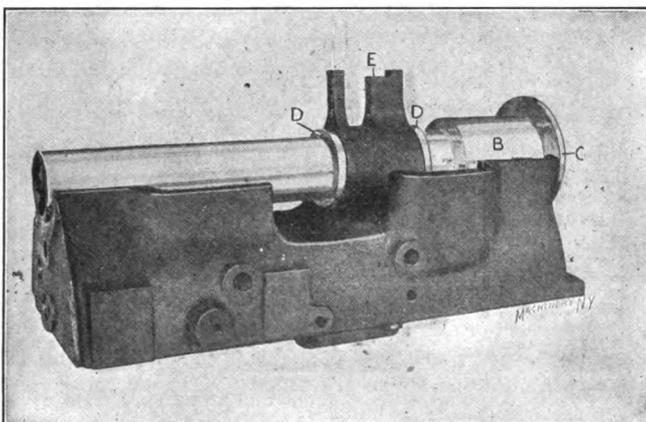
Method of Gaging Clearances for Spindle Gears in a Lathe Head-stock
